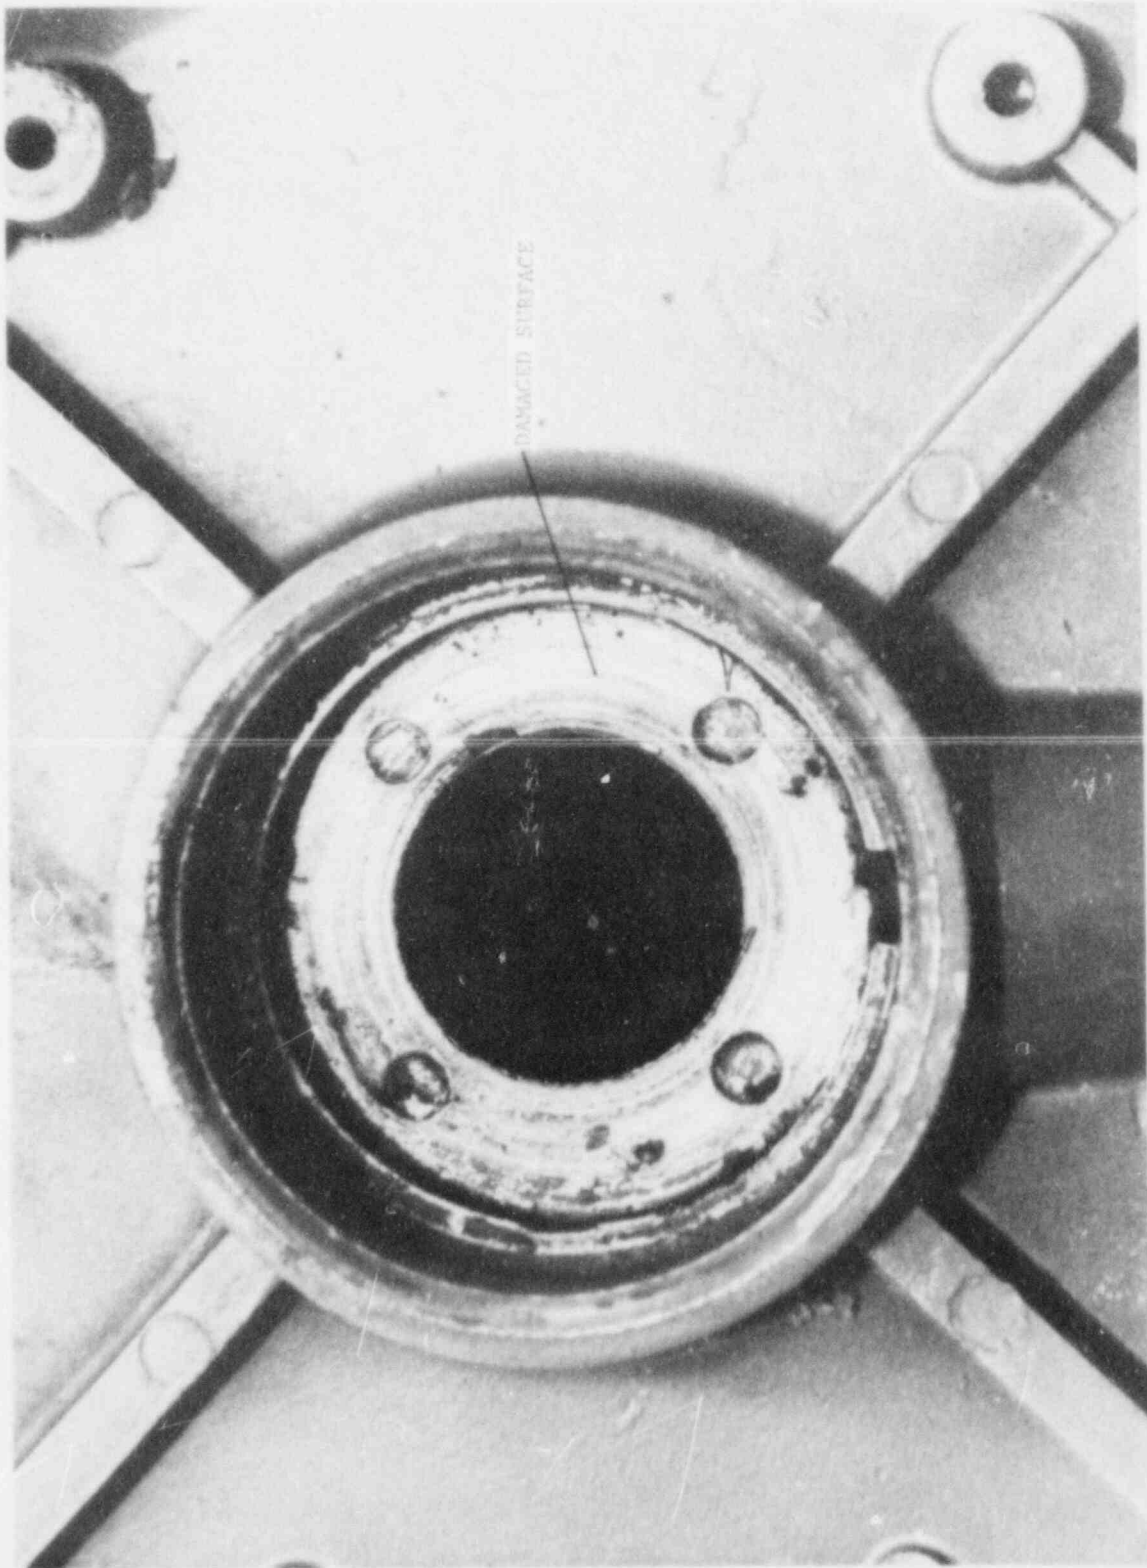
Scores on End Bracket due to Bearing Damage
